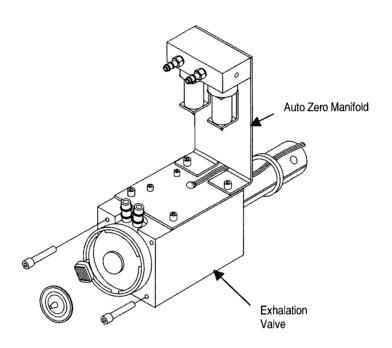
Exhalation Valve/Auto Zero Manifold
